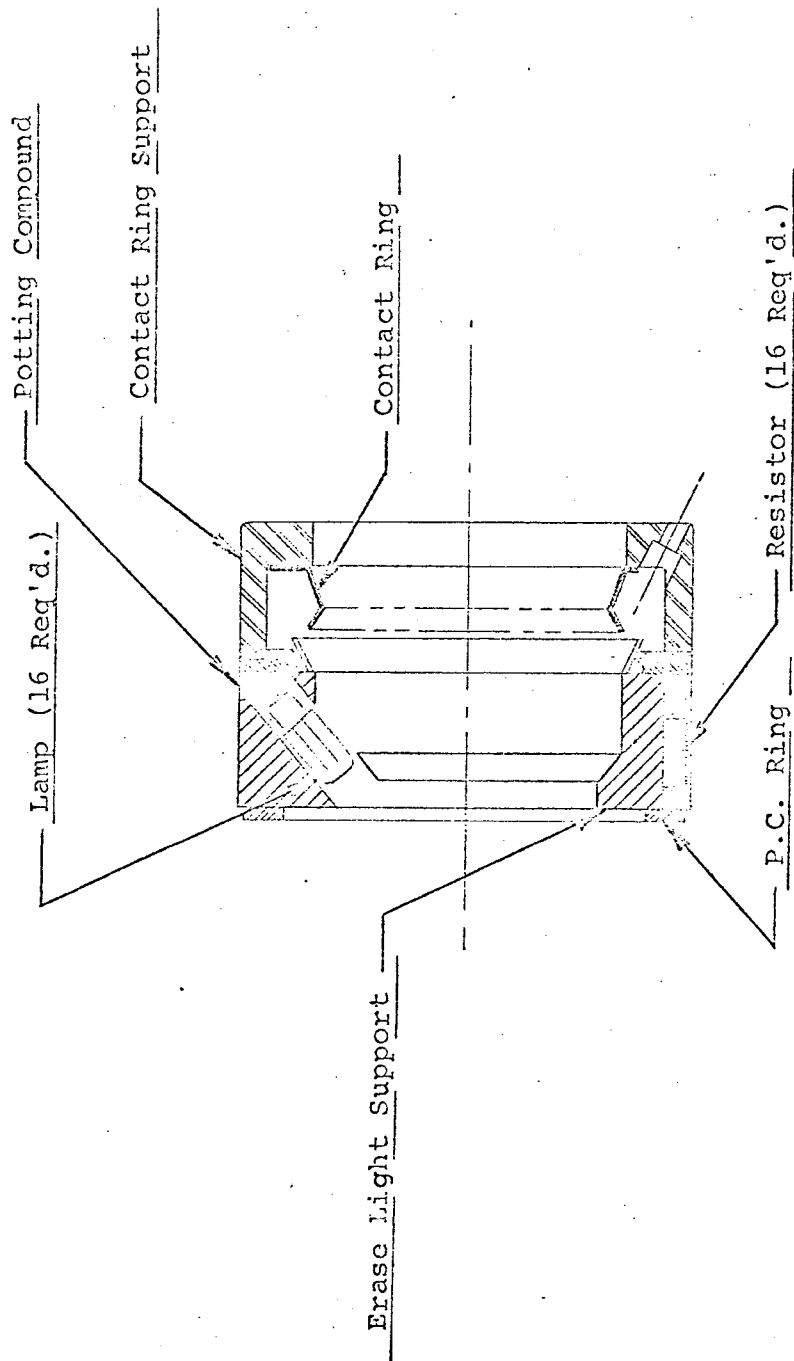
Erase Light and Contact Ring Assembly
